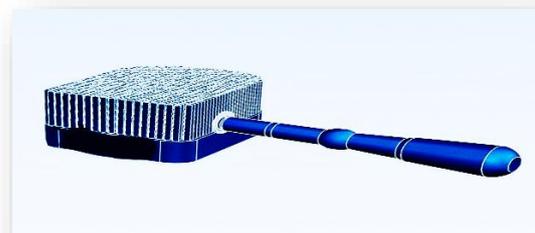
Detachable toothbrush handle and head design. Complete assembly
